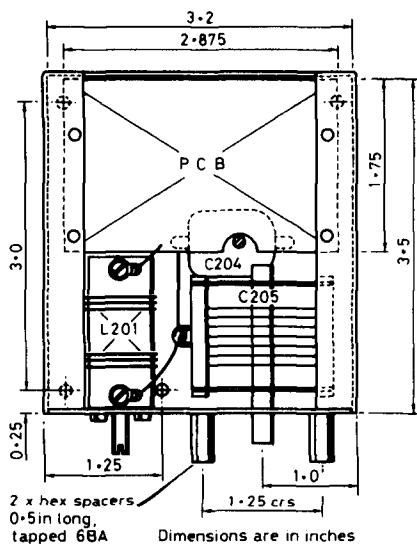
(A). LAYOUT OF COMPONENTS INSIDE THE PURPOSE-BUILT ALUMINIUM BOX FOR MODULE 2 - THE VFO.
